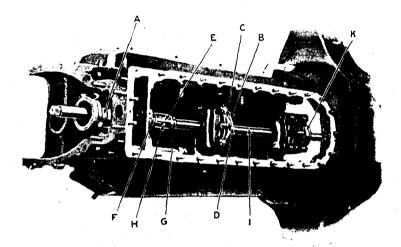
Reaming Crankshaft Main Bearings with Reamer 79255
